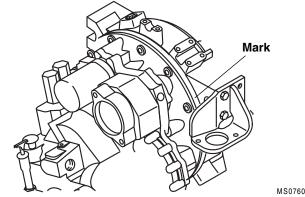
Mark a capscrew locating hole on the transmission converter housing and engine flywheel housing.
